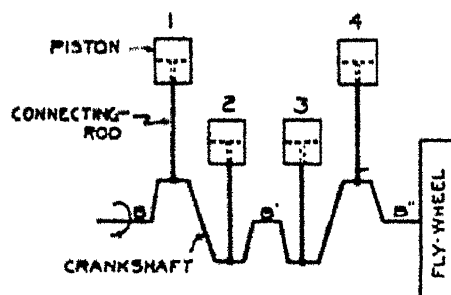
Arrangement of cranks in typical four-cylinder engine
